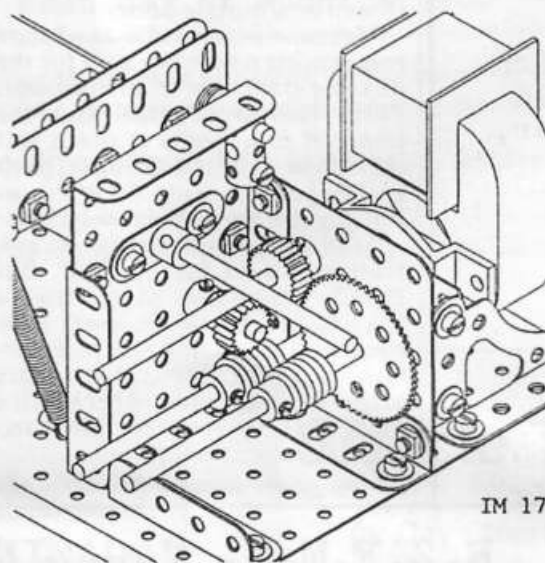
The front of the gearbox and some of the gearing has been removed to reveal the rest of the gearing. Also revealed is the worm and pinion gearing for rotating the eccentrics to raise and lower the third roller
